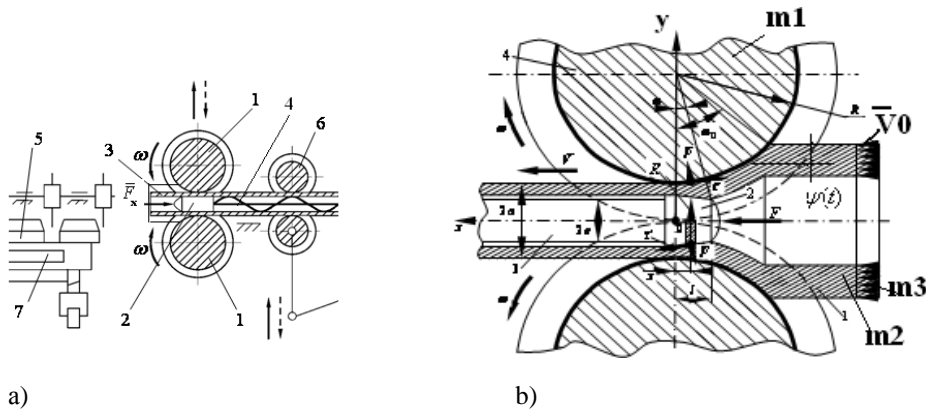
The schemes of automatic mill of pipe rolling plant and interaction of the hollow billet with rolls: 1 – roll; 2- mandrel; 3 – hollow billet; 4 – mandrel core; 5 - fore plate; 6 - stripper rolls; 7 – pusher of the billet.
